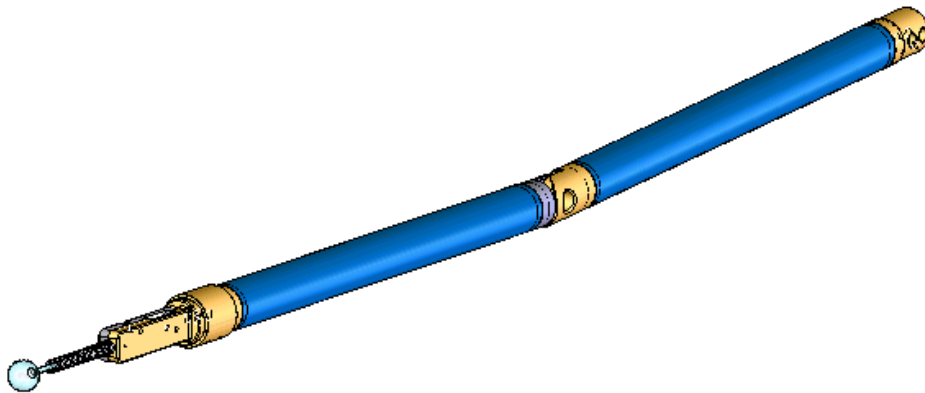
Hinge rod. This hinge can only bend to 90 degrees, and will make it possible to map out cylindrical surfaces in the inner vessel.
